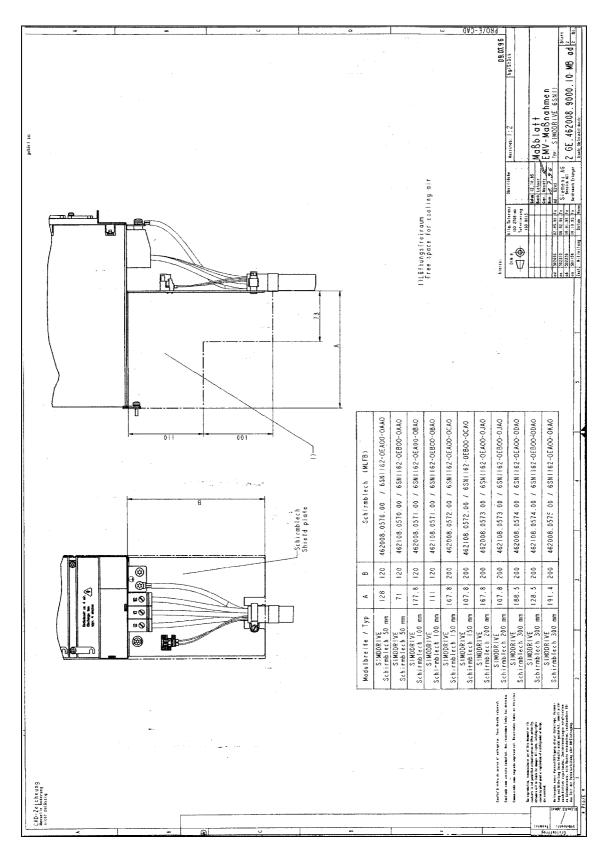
EMC measures, Sheet 2 (shield connecting plate)
